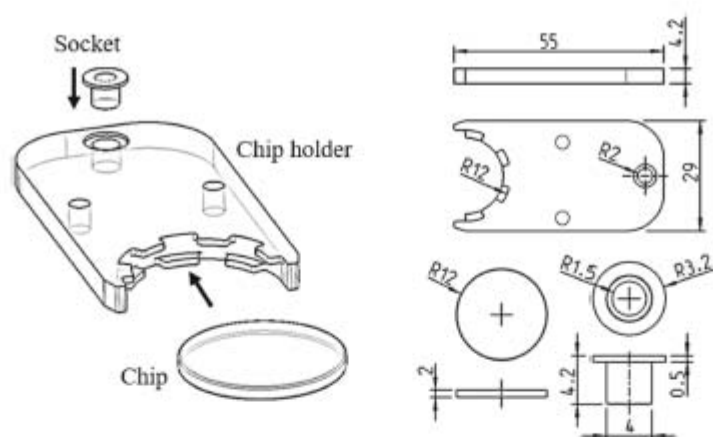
Shapes and dimensions of socket, chip and chip holder
